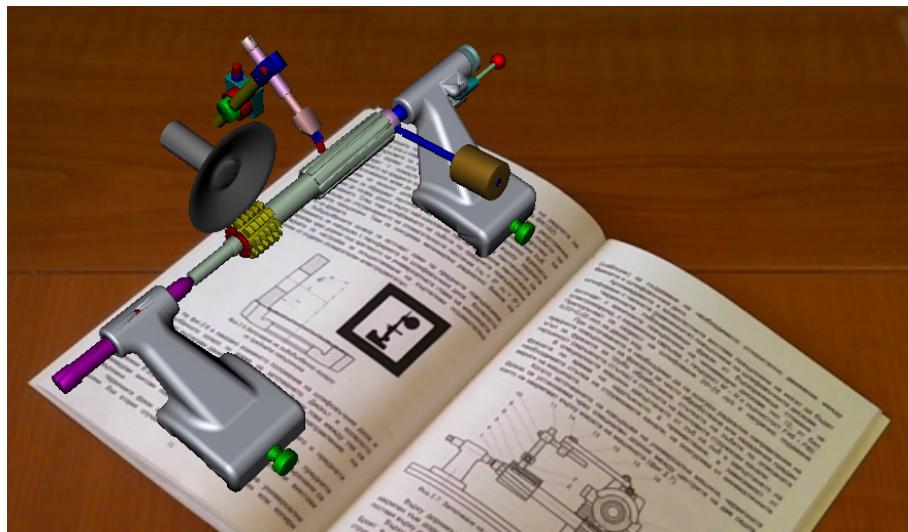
Gear Hob holding device for tool&cutter grinding machine
